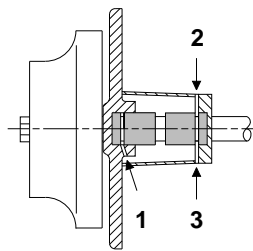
Back-to-back seal arrangement with two separate shaft seals in a seal chamber
